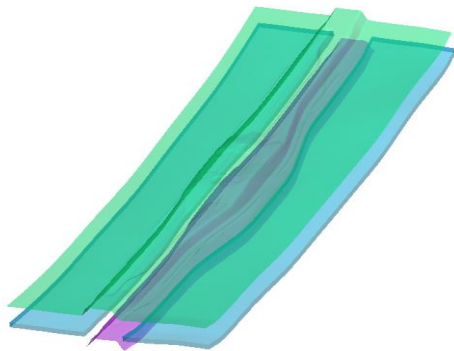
FE tool and blank models using the PAM-STAMP software.
